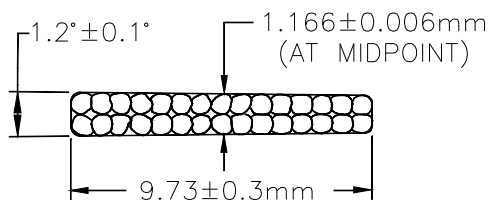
Cross section of the cable to be used to fabricate coils for LHC dipoles.
